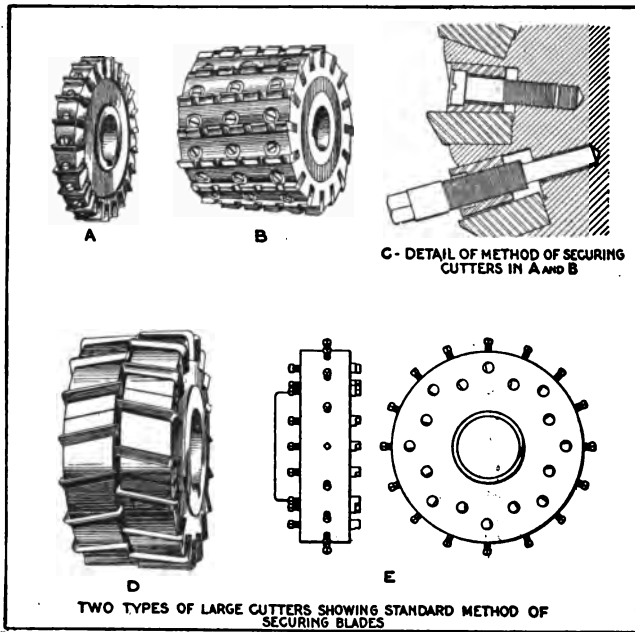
TYPES OF INSERTED-TOOTH MILLING CUTTERS
